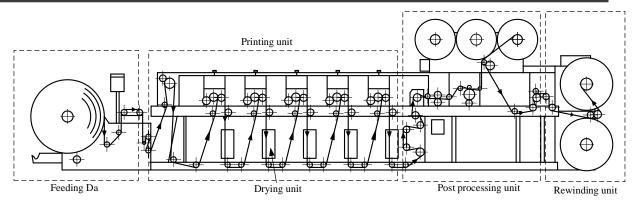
Structural sketch of machine type flexographic cylinder printing machine
